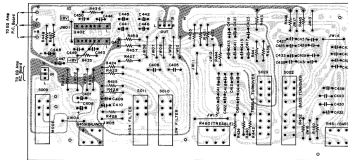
TONE AMP P.C. BOARD (AF-H02)
